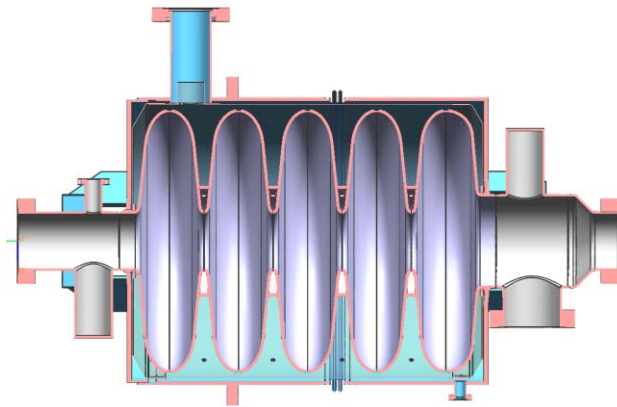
A section view of the complete assembly of the inner magnetic shield inside the He tank.
